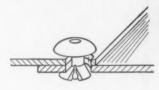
Expanded prongs force sheets or parts together, hold them tightly in compression. No metal is removed, no grinding or finishing is required.
